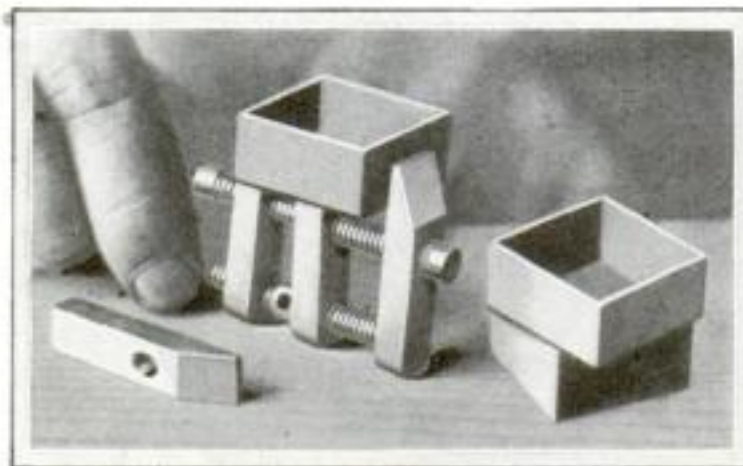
How two parallel clamps can be used together in order to take extra wide work.
